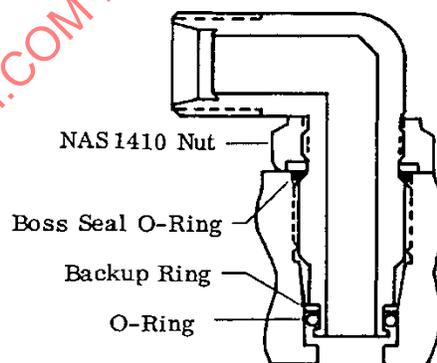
90 DEGREE ADAPTER FITTING INSTALLED IN RECESSED SEAL BOSS
